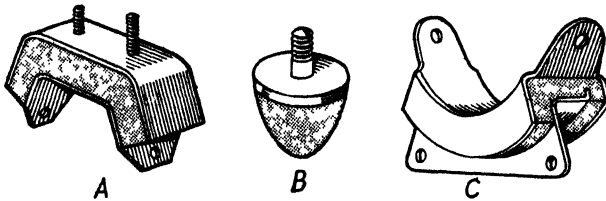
BONDED RUBBER SUPPORTS FOR CHRYSLER ENGINE MOUNTING
